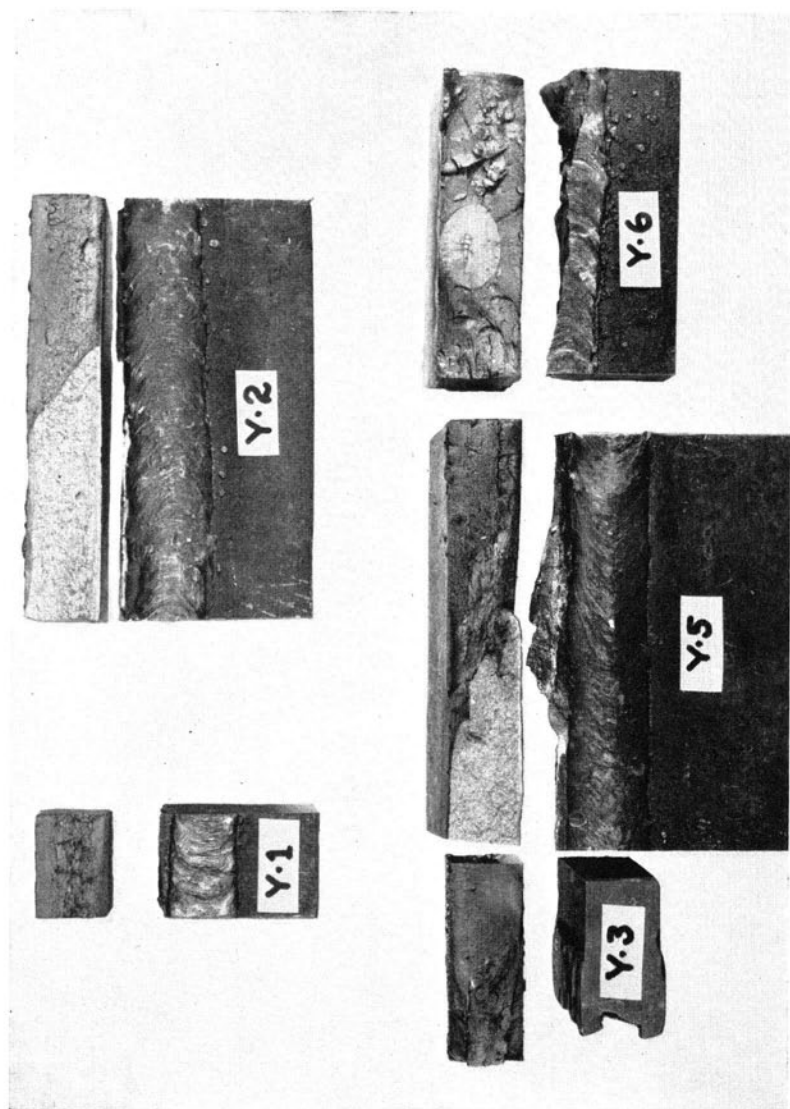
(a). FRACTURES OF THE Y SPECIMENS
